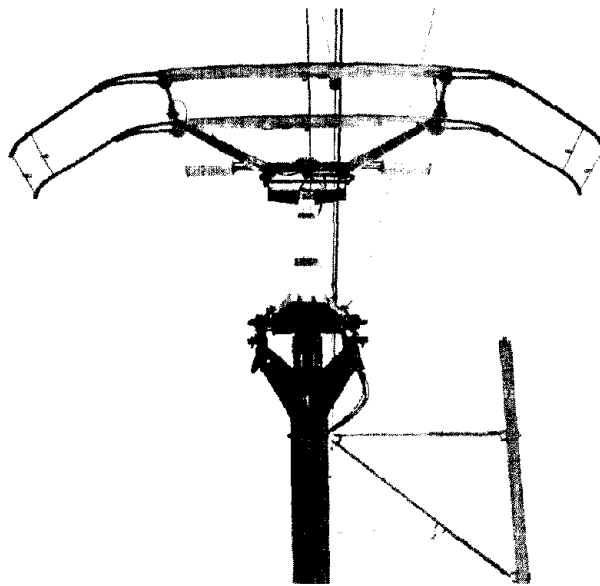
THE 'PROTOTYPE' HEAD ASSEMBLY.
